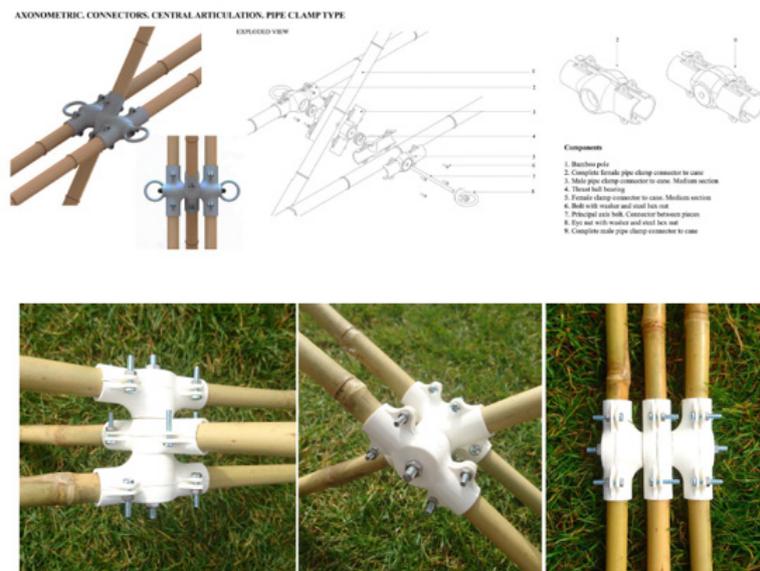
a. Detail of the components of the type 1 double-hinged axial joint designed in solidworks. b. Photos of the 3D printed joint using wild cane bars on real scale.
